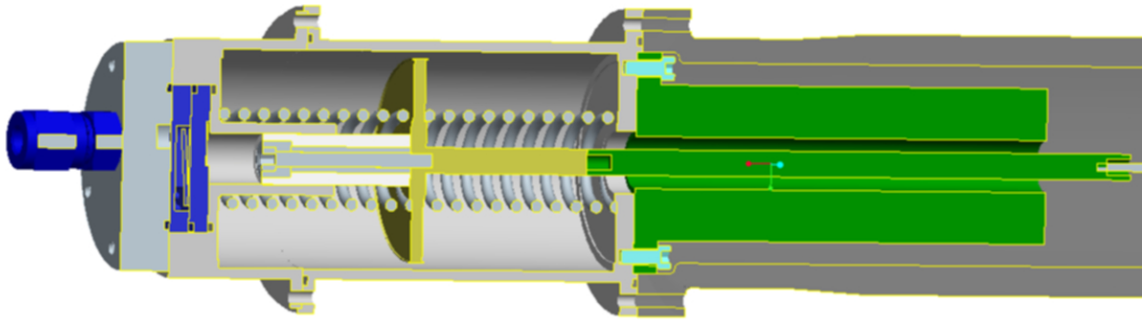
Global section view of prototype compressor with revised piston design, Revision 01.
